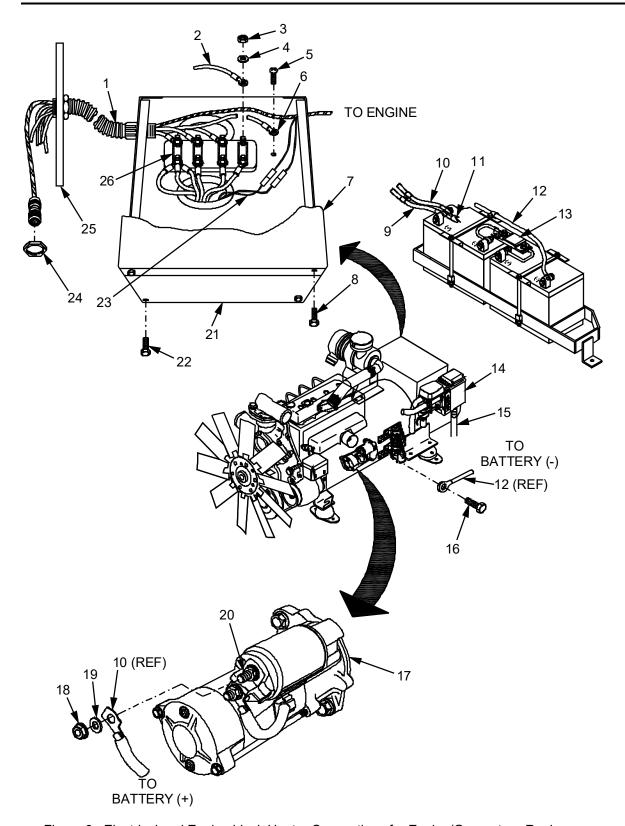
Electrical and Engine block Heater Connections for Engine/Generator - Replace.
